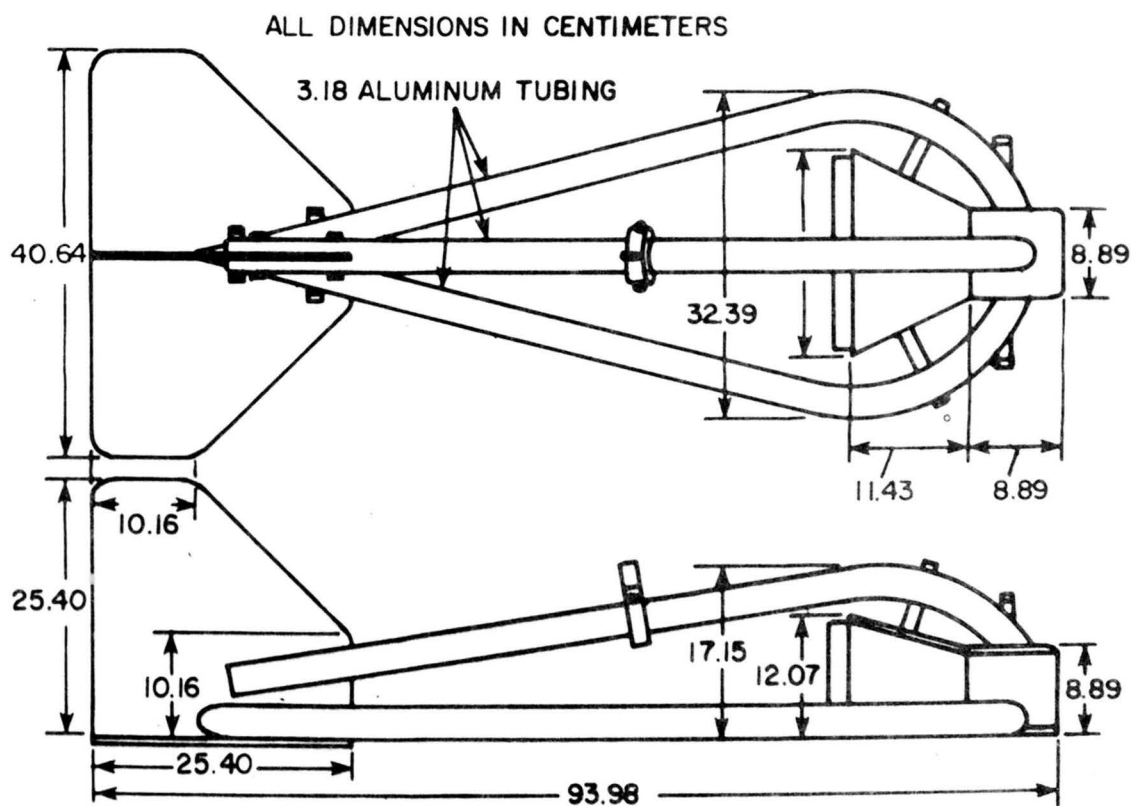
Plan and side elevation of 7.62-cm Helley-Smith bedload sampler
